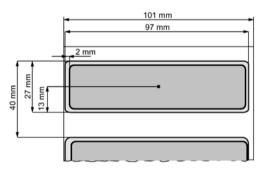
Dimension drawing SIMATIC RF630L 6GT2810-2AB02-0AX0
